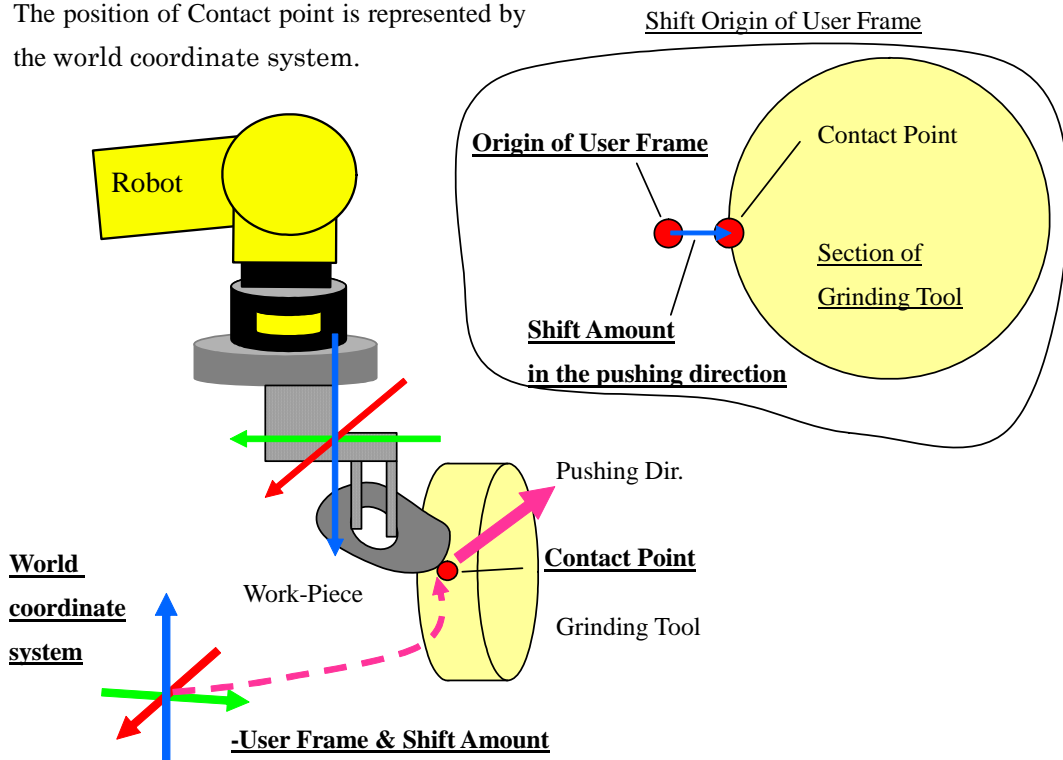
(i) Example 2 of setting USER to "3-Axis FS ContactP. Position"
